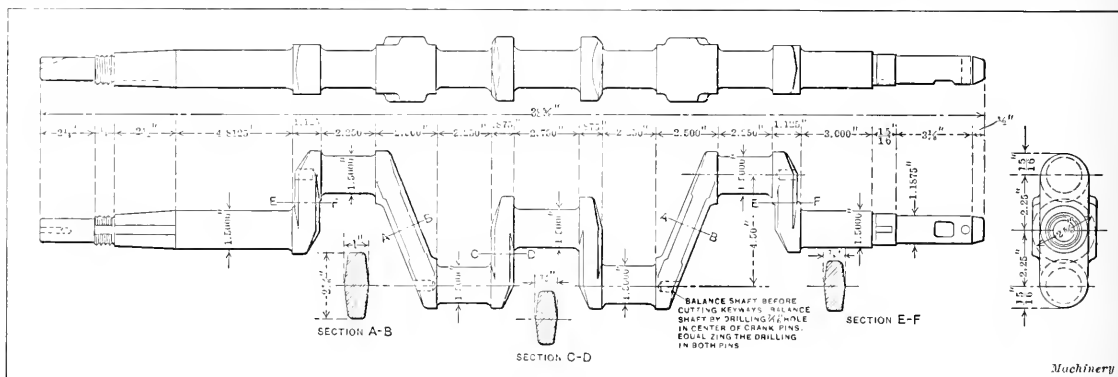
Important Dimensions of the Crankshaft shown in Fig. 1
